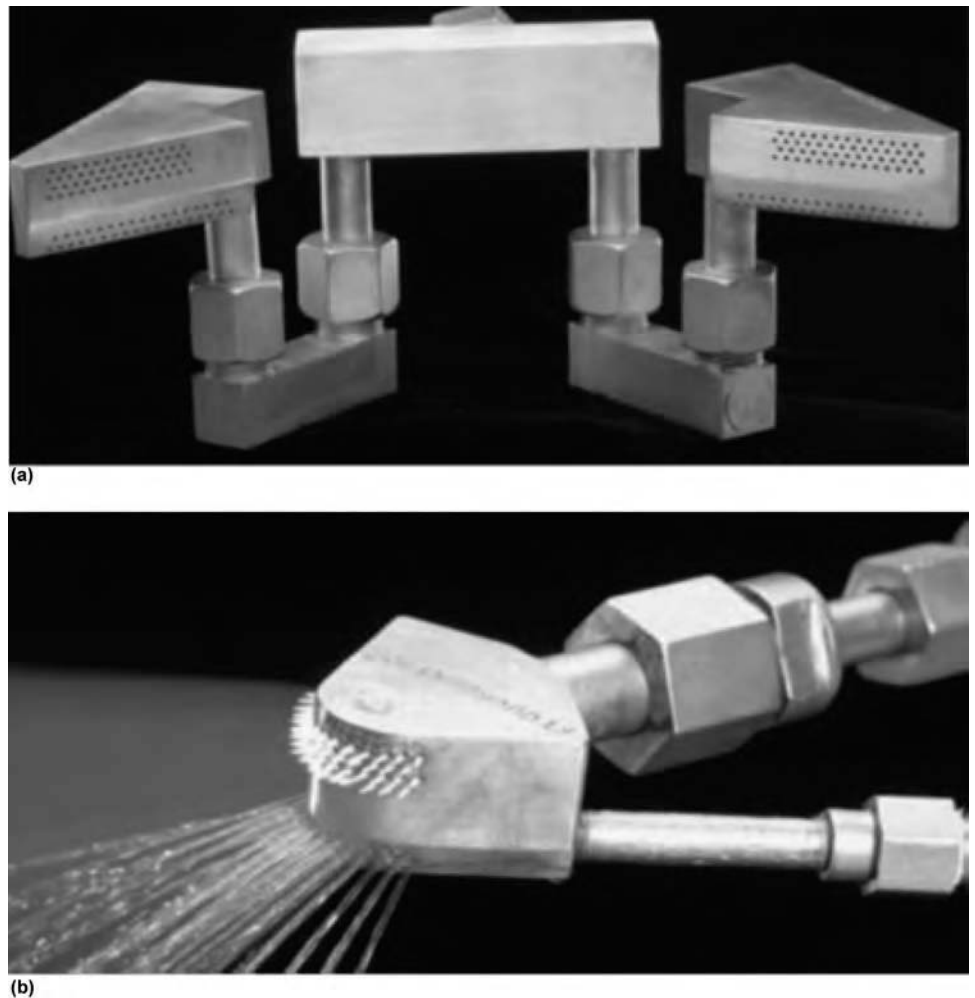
Representative flame head designs. (a) Gear tooth-hardening flame head. (b) Sheave-hardening flame head. Source: Ref 3
